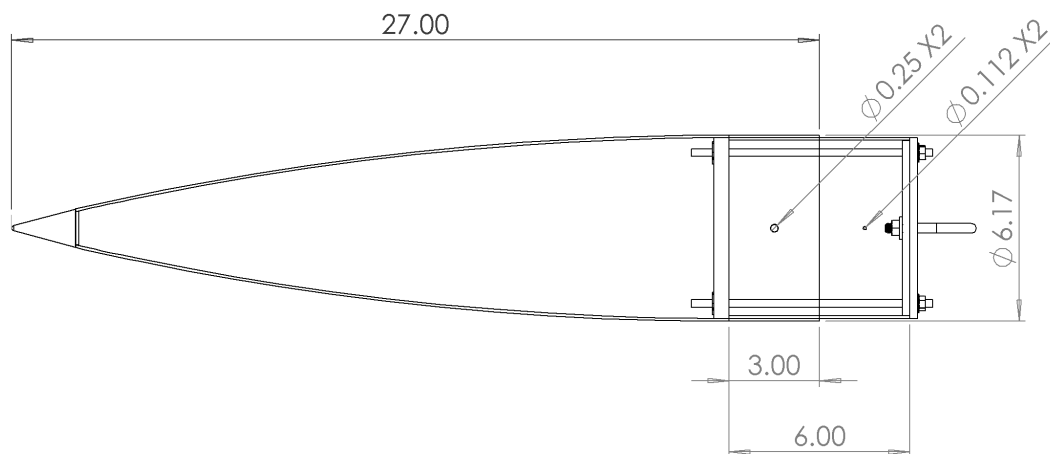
Nose Cone/Payload Bay assembly dimensions [in.]
